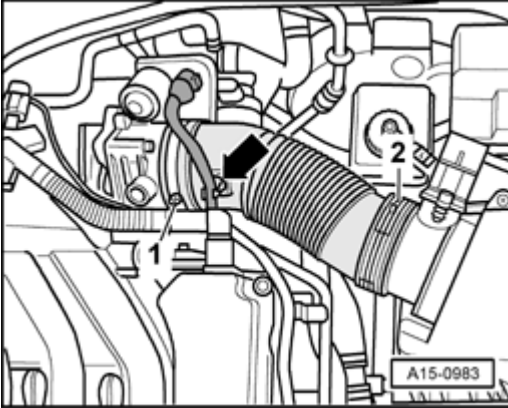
Loosening Hose Clamps And Removing Air Hose Between Air Cleaner Housing & Throttle Valve Control Module -J338-
